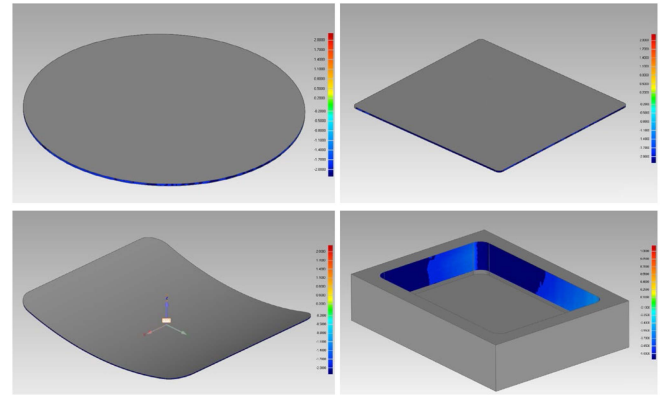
Machined workpieces are measured again to evaluate material removal.
